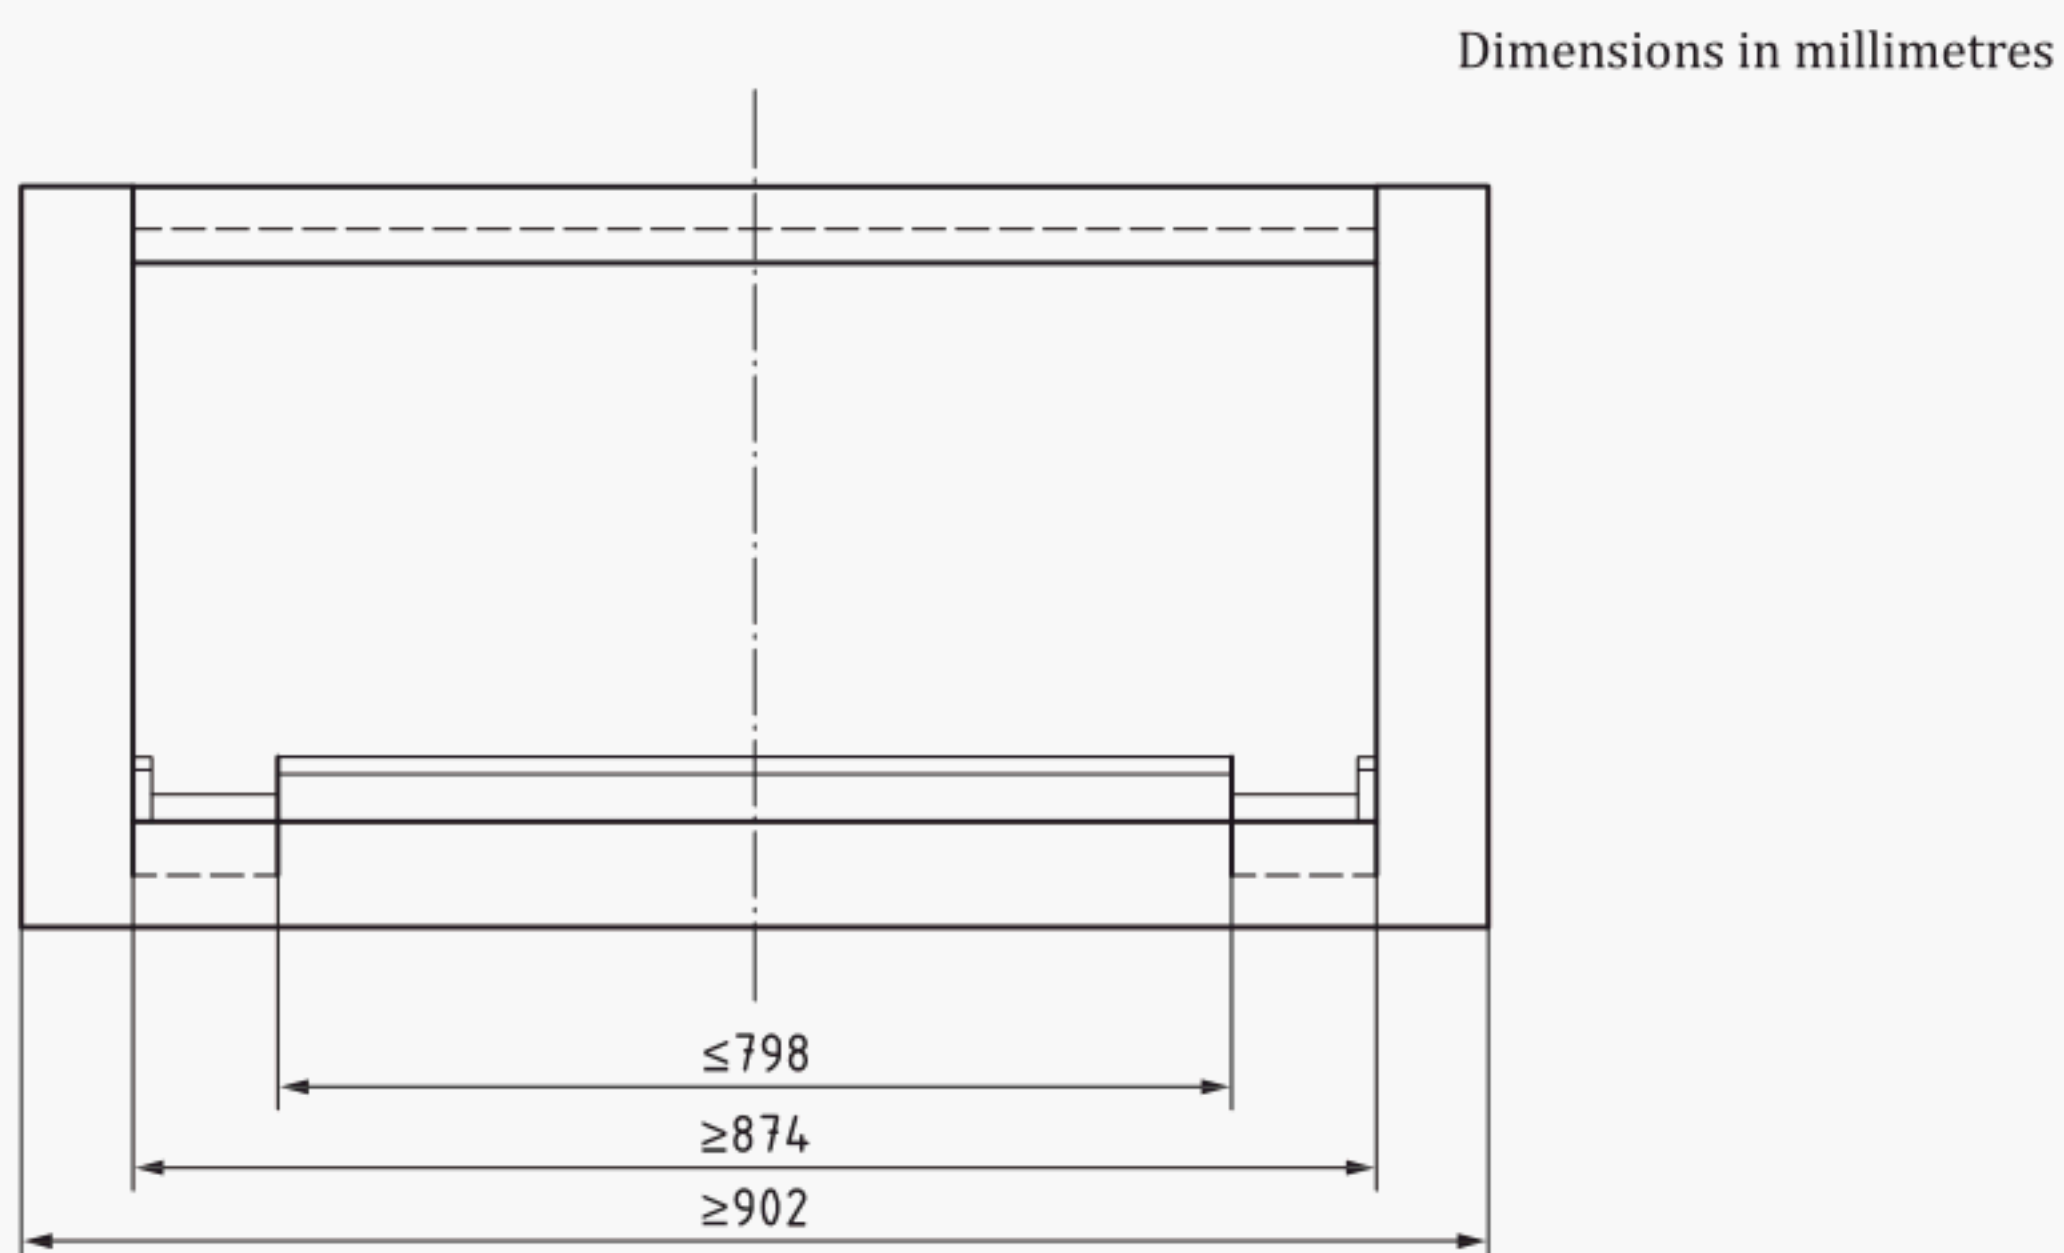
Narrow skid steer loader attachment frame – Rear view
